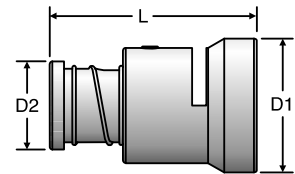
Captive O-Ring Assembly Tool dimensions
